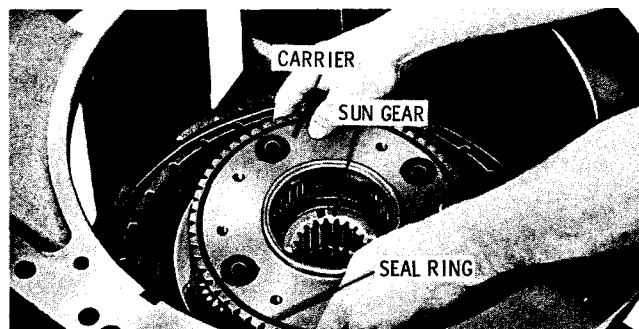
Installing intermediate-range planetary carrier assembly
